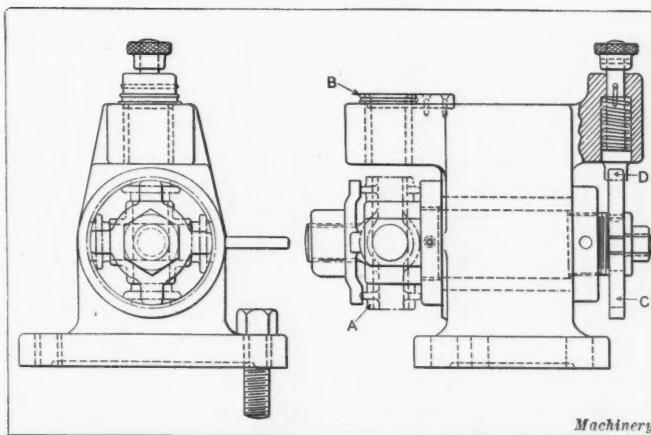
Indexing Fixture used on Drilling Machine shown in Fig. 1 for drilling Four Holes in Universal Joint Rings
